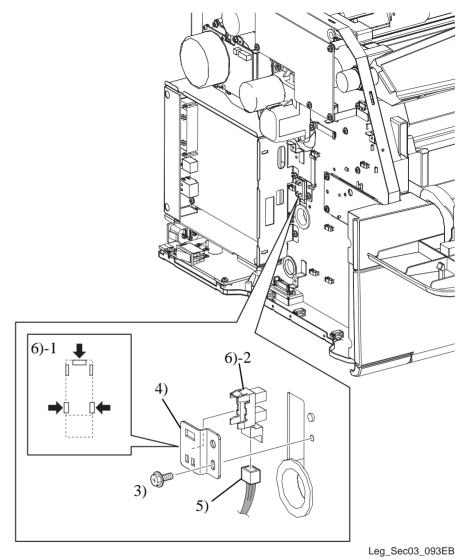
Removal of SENSOR ROTARY HOME POSI
